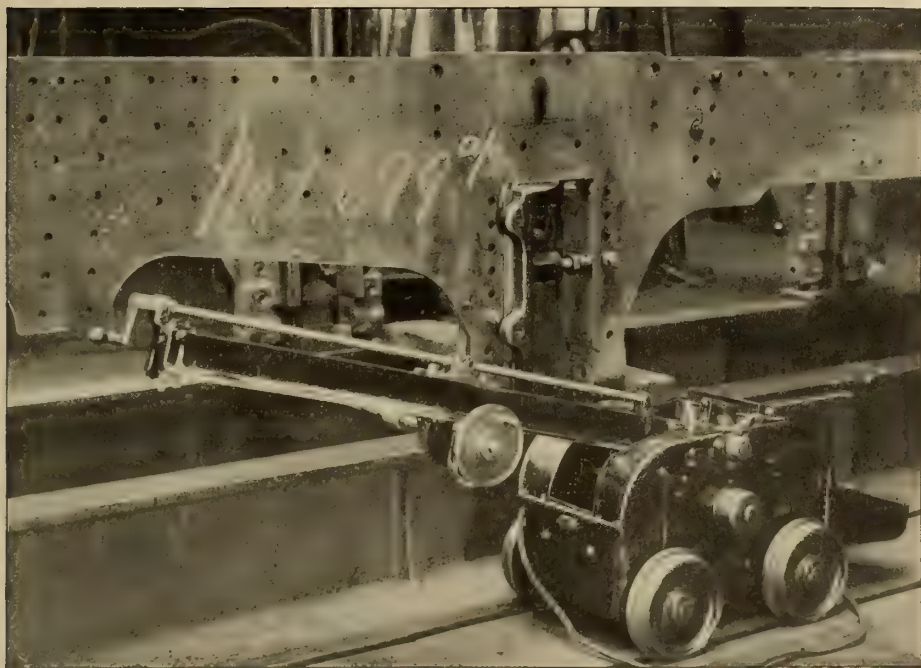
AN ELECTRICALLY-DRIVEN DRILLING MACHINE
